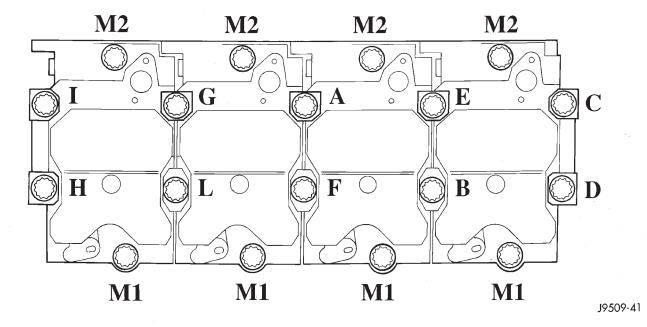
Engine Cylinder Head Bolt Tightening Sequence
